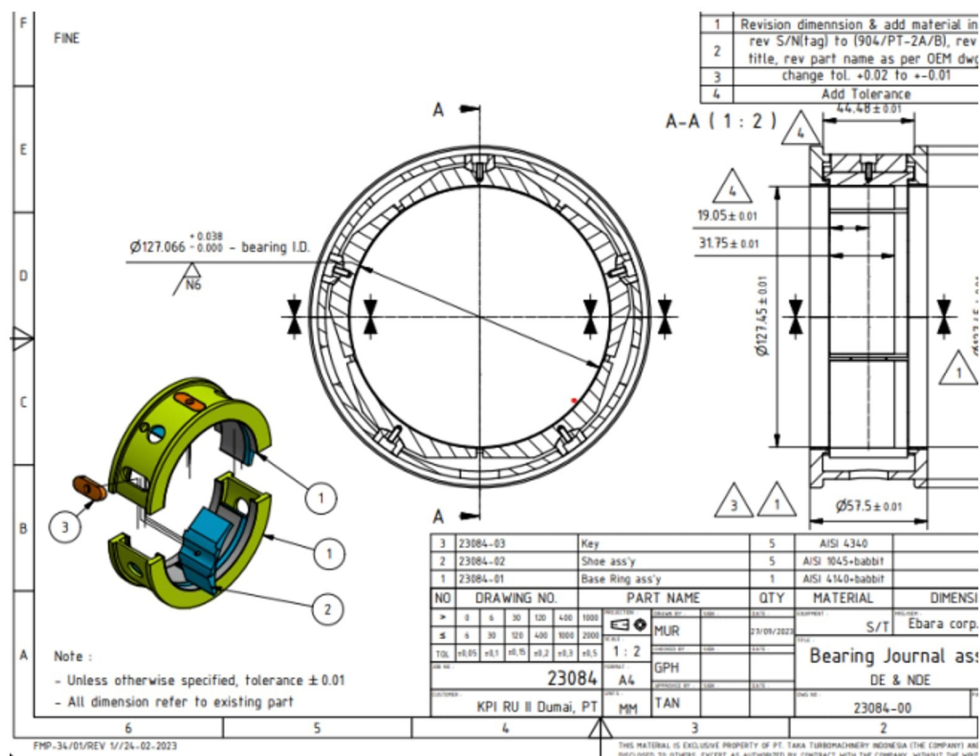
The Steam Turbine Shaft 940-PT 2 A/B bearing journal's typical dimensions
